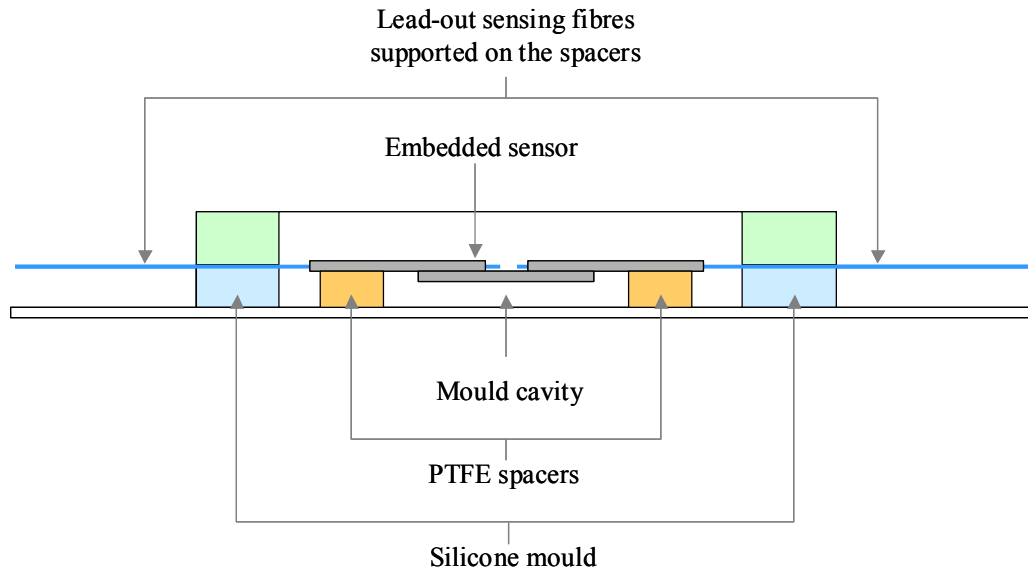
Schematic illustration of the mould set-up with a sensor secured inside the mould cavity.
